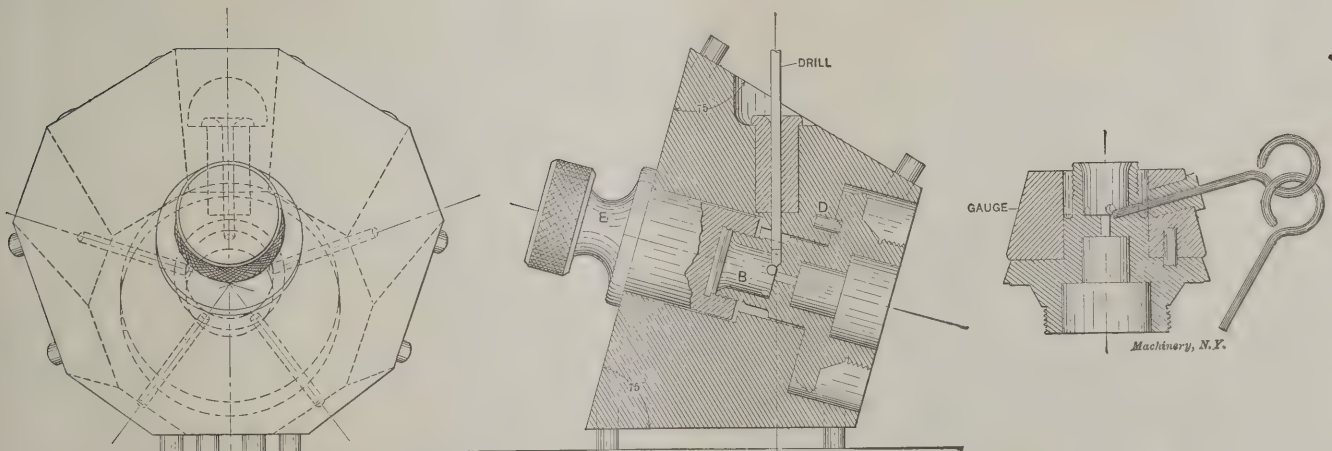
Jig for Drilling Angular Holes in Percussion Fuse.
